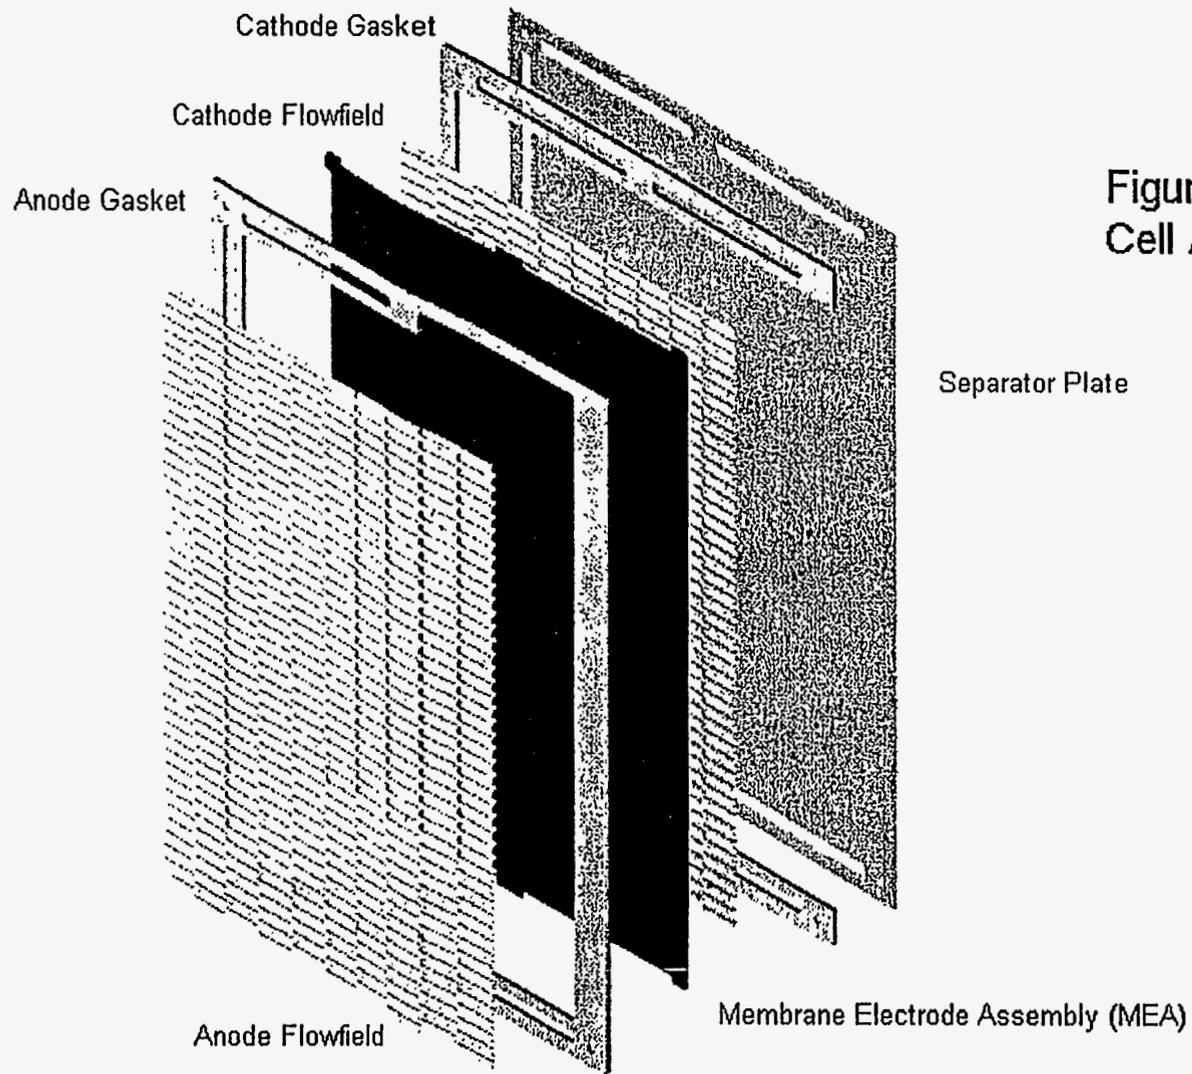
Three-piece Metallic Cell Cell Assembly Schematic
